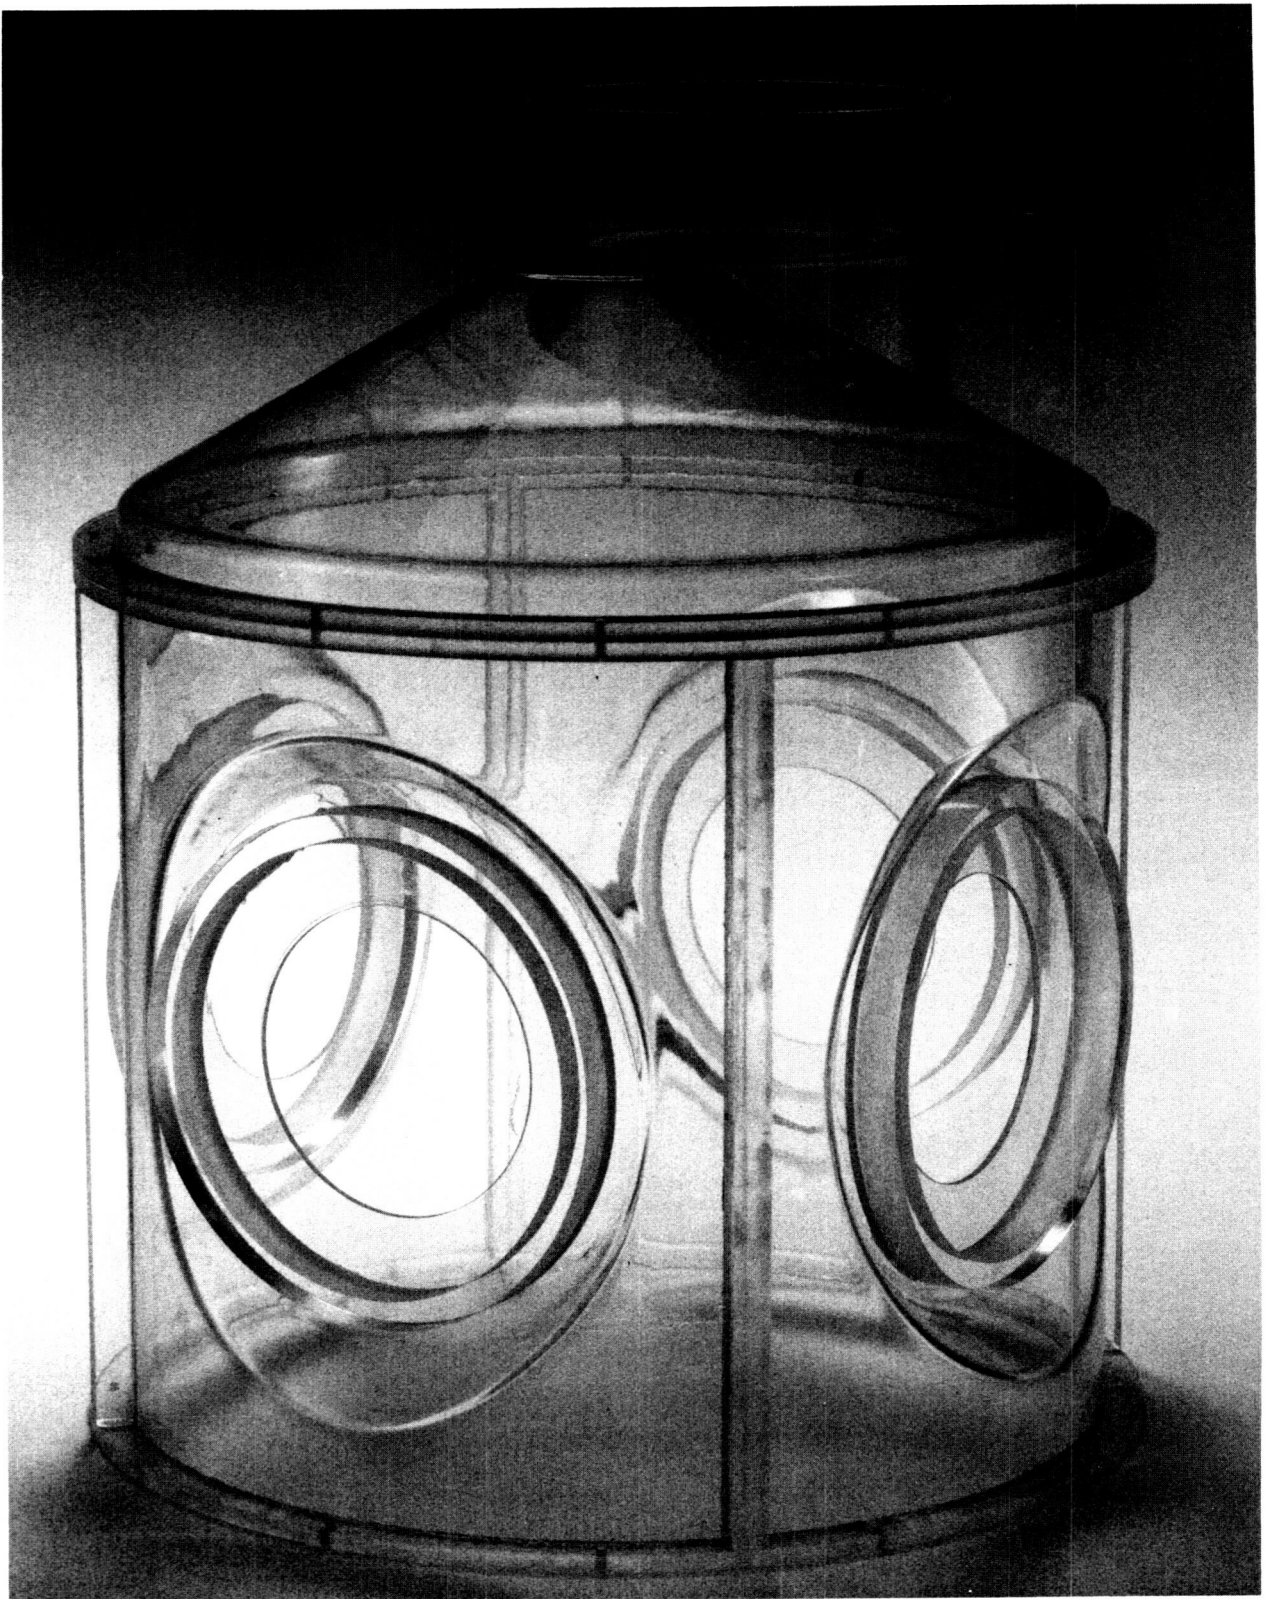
Frusto-conical end cap with off-center port mounted on radial port segment.
